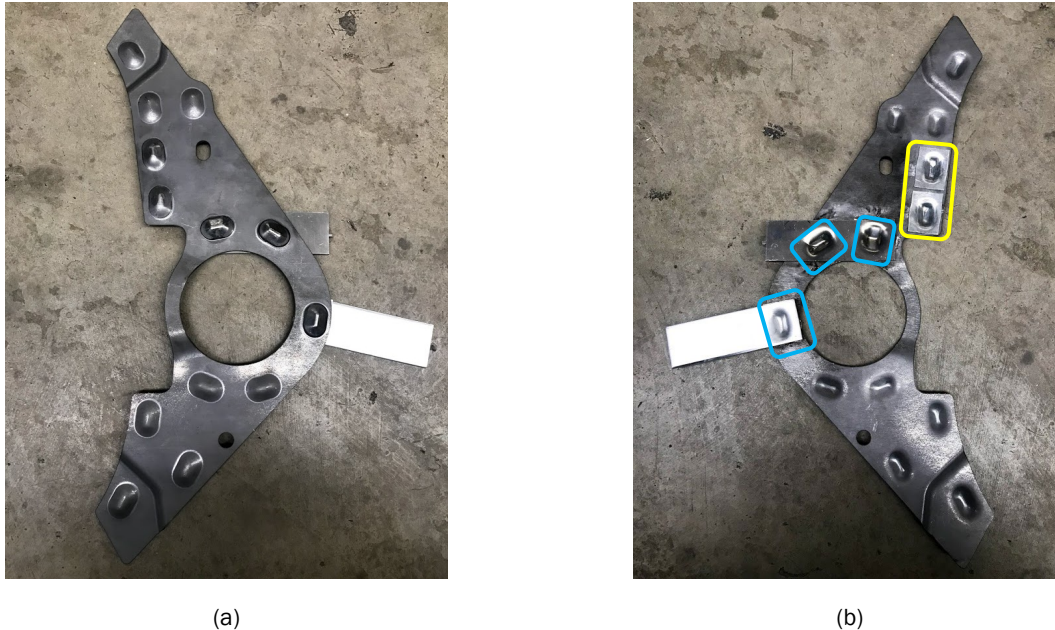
VFA-welded thick 5000 series Al coupon with HSLA 340 subcomponents: (a) steel side shows no damage; and (b) Al side shows successful welds of first weld (yellow) and second weld (blue). Source: The Ohio State University.
